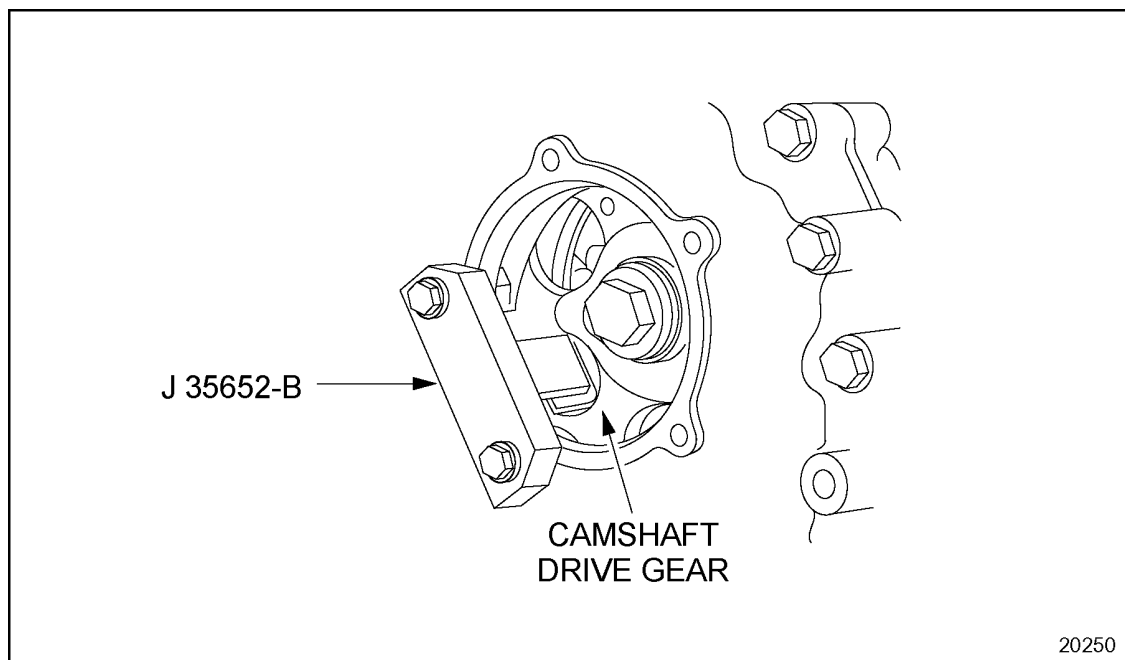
Installation of Camshaft Drive Gear Torque Holding Tool
